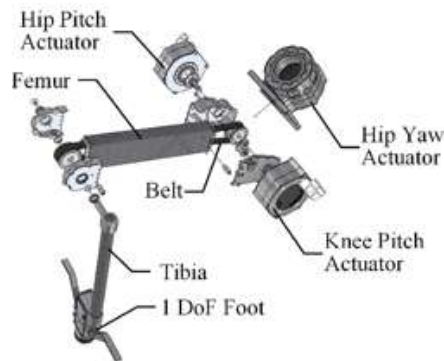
Robot's leg exploded view (Courtesy : IEEE Xplore)
